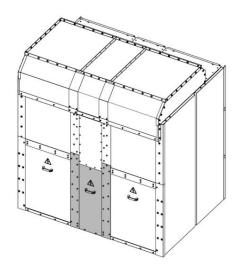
All panel versions except for contactor panels with panel width 435 mm: Rear wall, 3-panel arrangement
